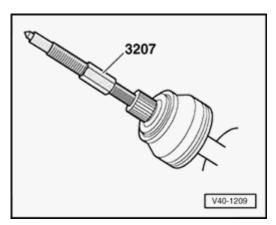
Identifying Tighten Pressure Spindle 3207 Courtesy of VOLKSWAGEN UNITED STATES, INC.
